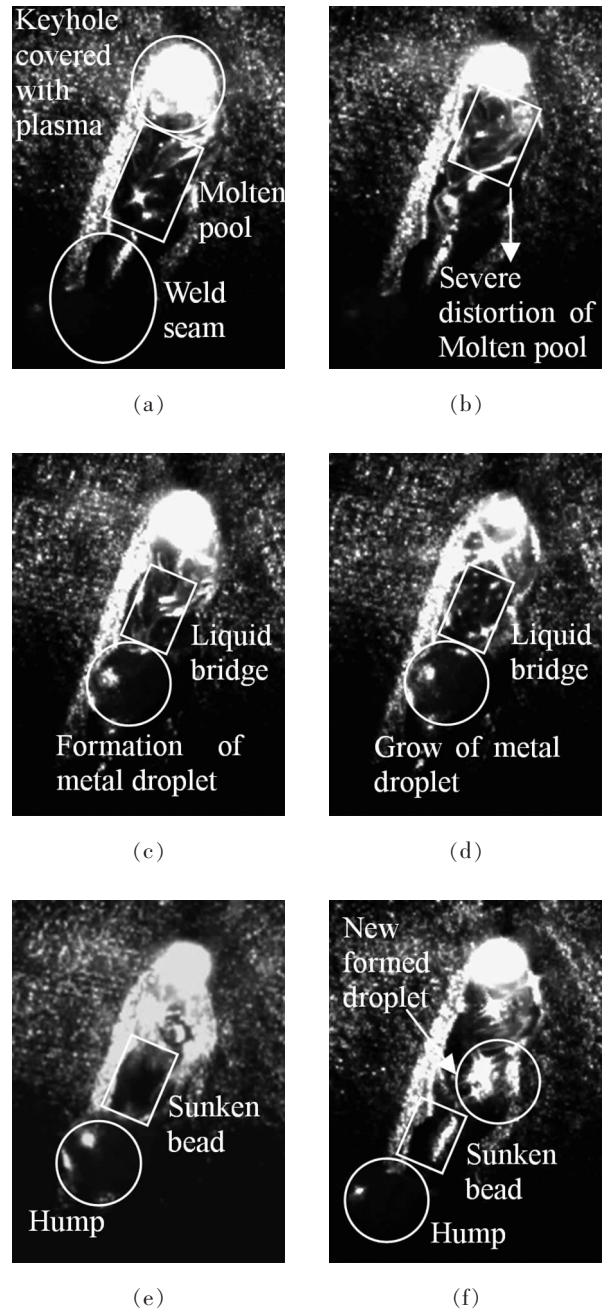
Image of hump bead captured by high-speed camera (6 000 fps) in gas-jet-assisted keyhole laser welding
